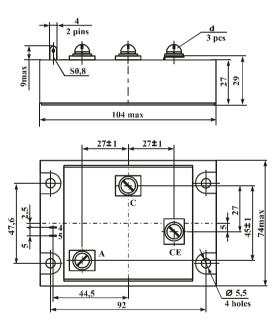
Overall drawing of modules M11-50(100)-12-01
